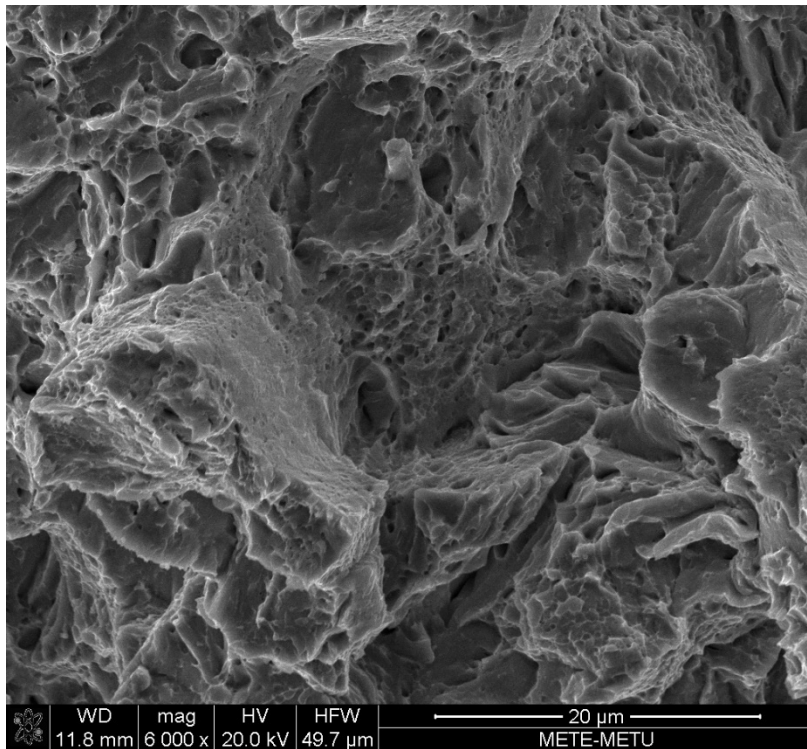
Fracture surfaces of Charpy impact test specimens of carbide-free lower bainite of 60SiMn5 transformed at 250°C, 5.5hr. (higher magnification).
